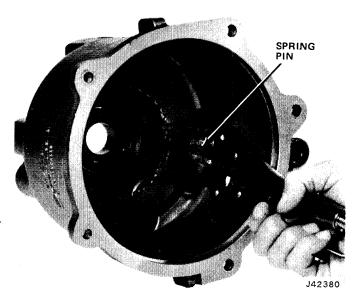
Removing Shift Fork Locating Spring Pin
